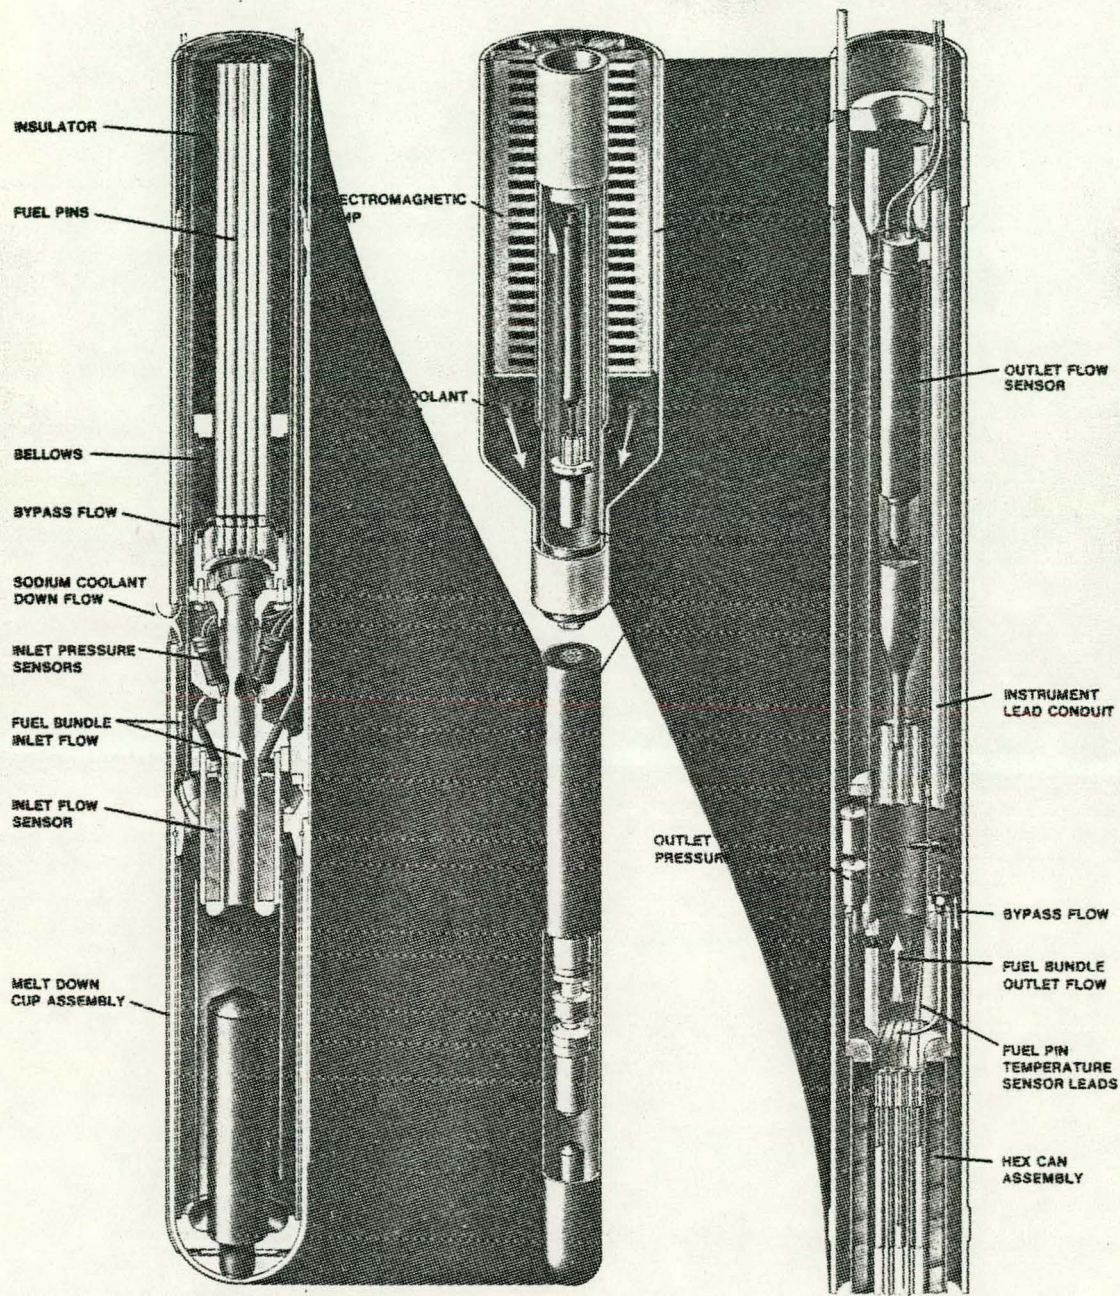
HEDL SLSF Experiment Assembly Lower Section.
